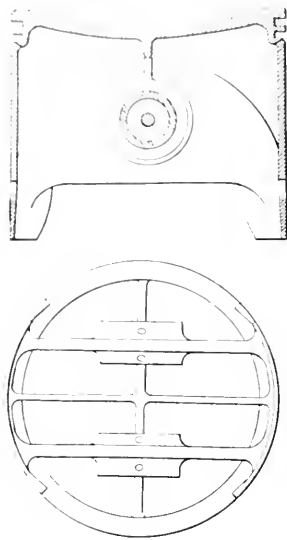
EXPERIMENTAL DESIGN OF ALUMINUM PISTON
